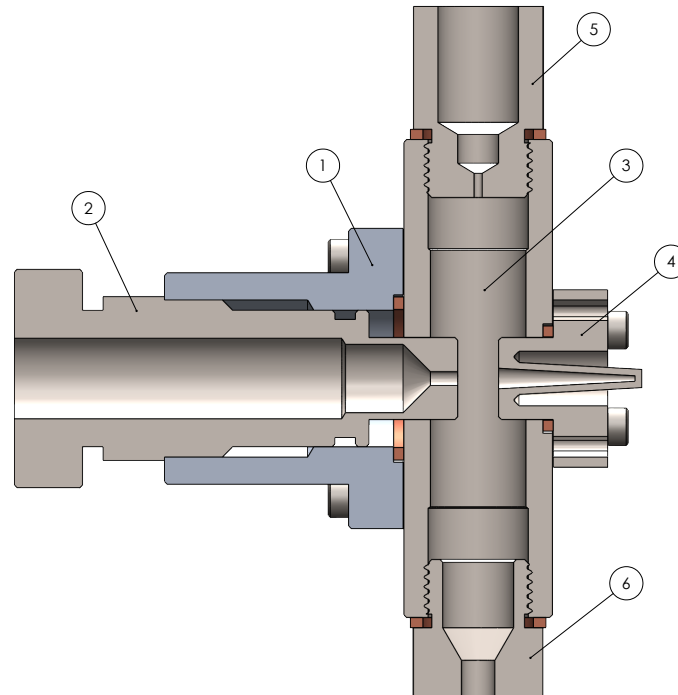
Section View of the igniter assembly, (1) oxygen injector support, (2) oxygen injector, (3) combustion chamber, (4) resonator, (5) methane injector, (6) exhaust nozzle.
